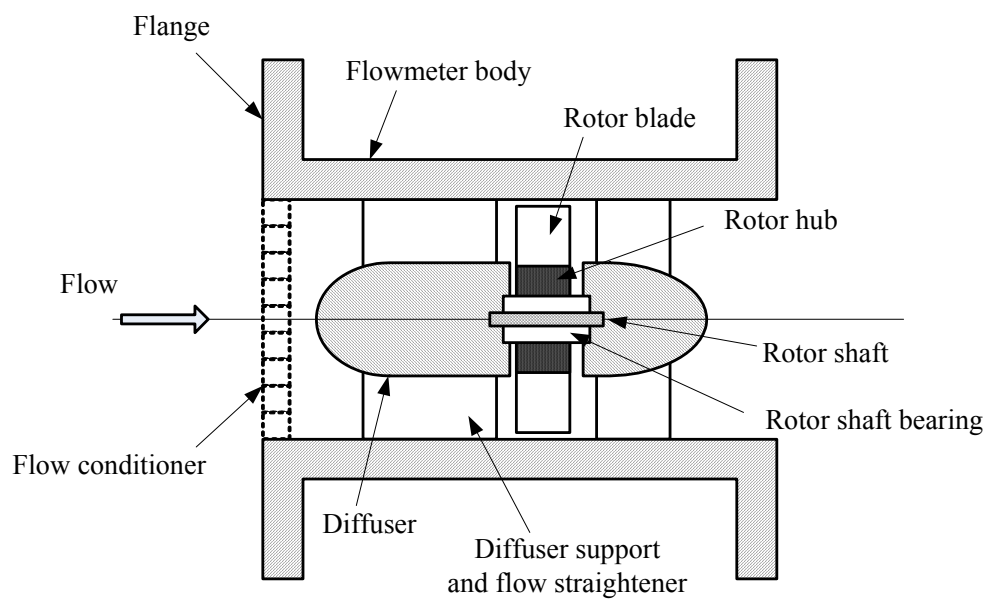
A cross-sectional view of a turbine meter depicting the key component
